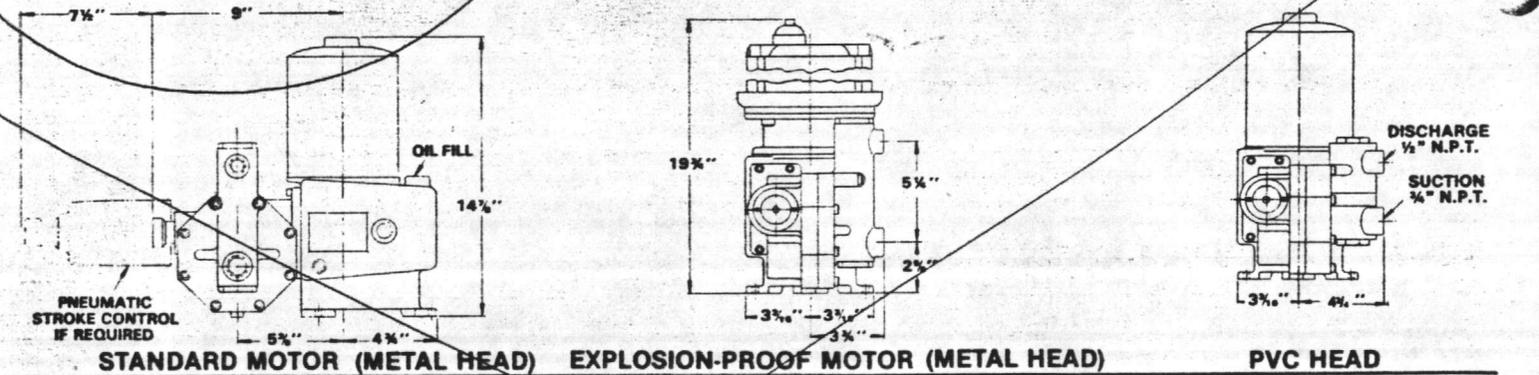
DIMENSIONS SERIES 500 "dia-PUMP" WITH METAL HEAD (EXCEPT MODEL 560)
